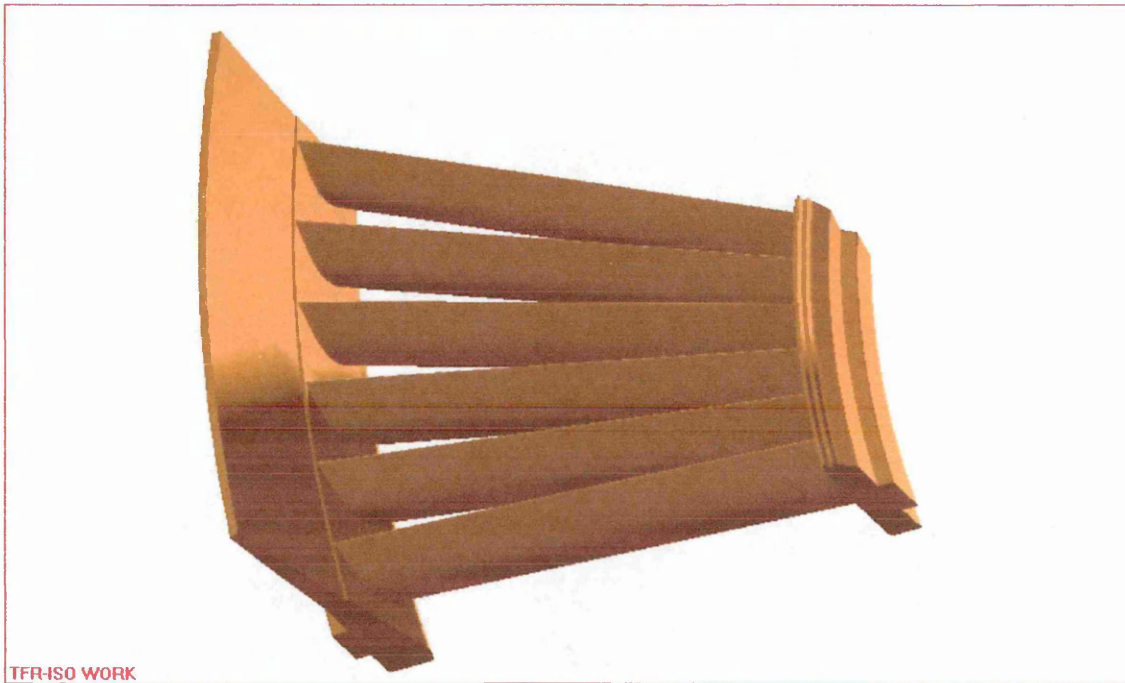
Proposed cast nozzle arrangement incorporating blade shield and front seal.
